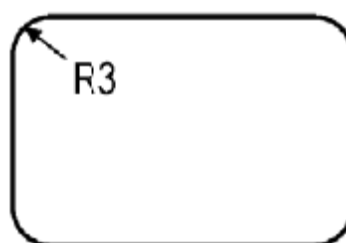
Cross section of butt weld specimens in welded area
